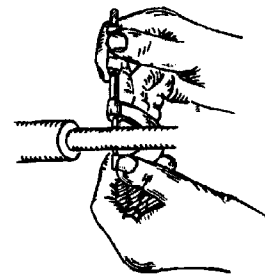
MEASURING WORK MOUNTED IN A MACHINE
